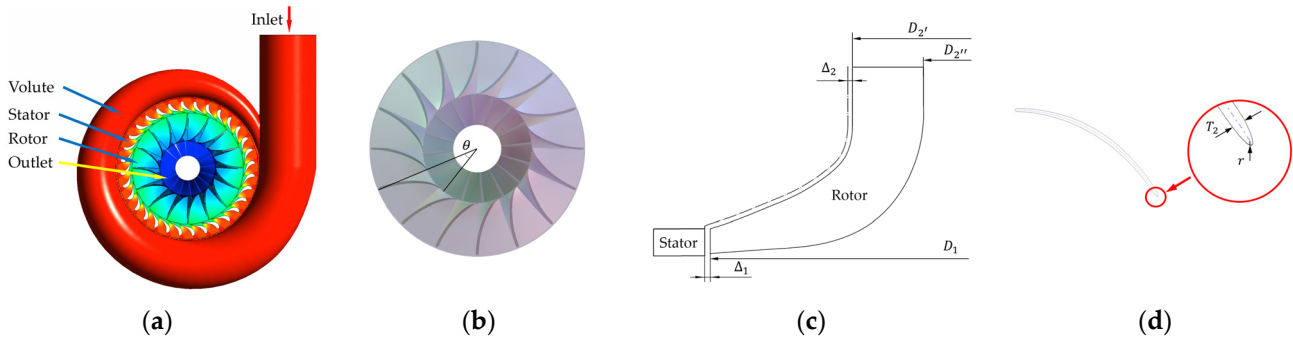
Impeller modeling parameters schematic diagram. (a) OTEC radial turbine appearance; (b) rotor blade twist angle θ at axial view; (c) radial clearance Δ_1 and tip clearance Δ_2 at meridian view; (d) rotor outlet blade thickness T_2 and rotor outlet blade fillet radius r at 50% leaf height cross section.
